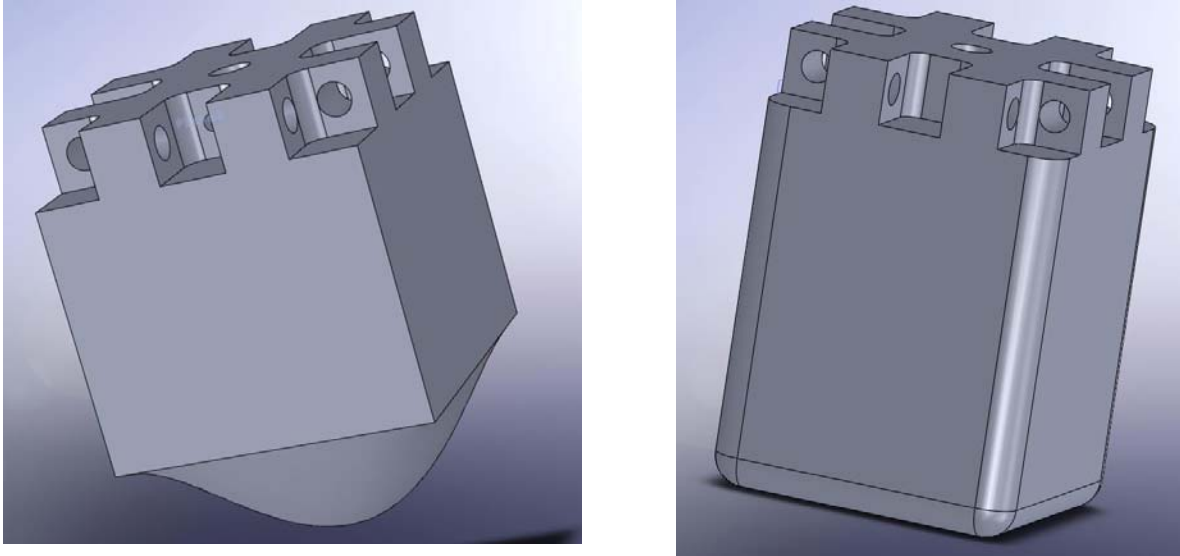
The mixing connection design differed slightly between the final design (left) and prototype (right).
